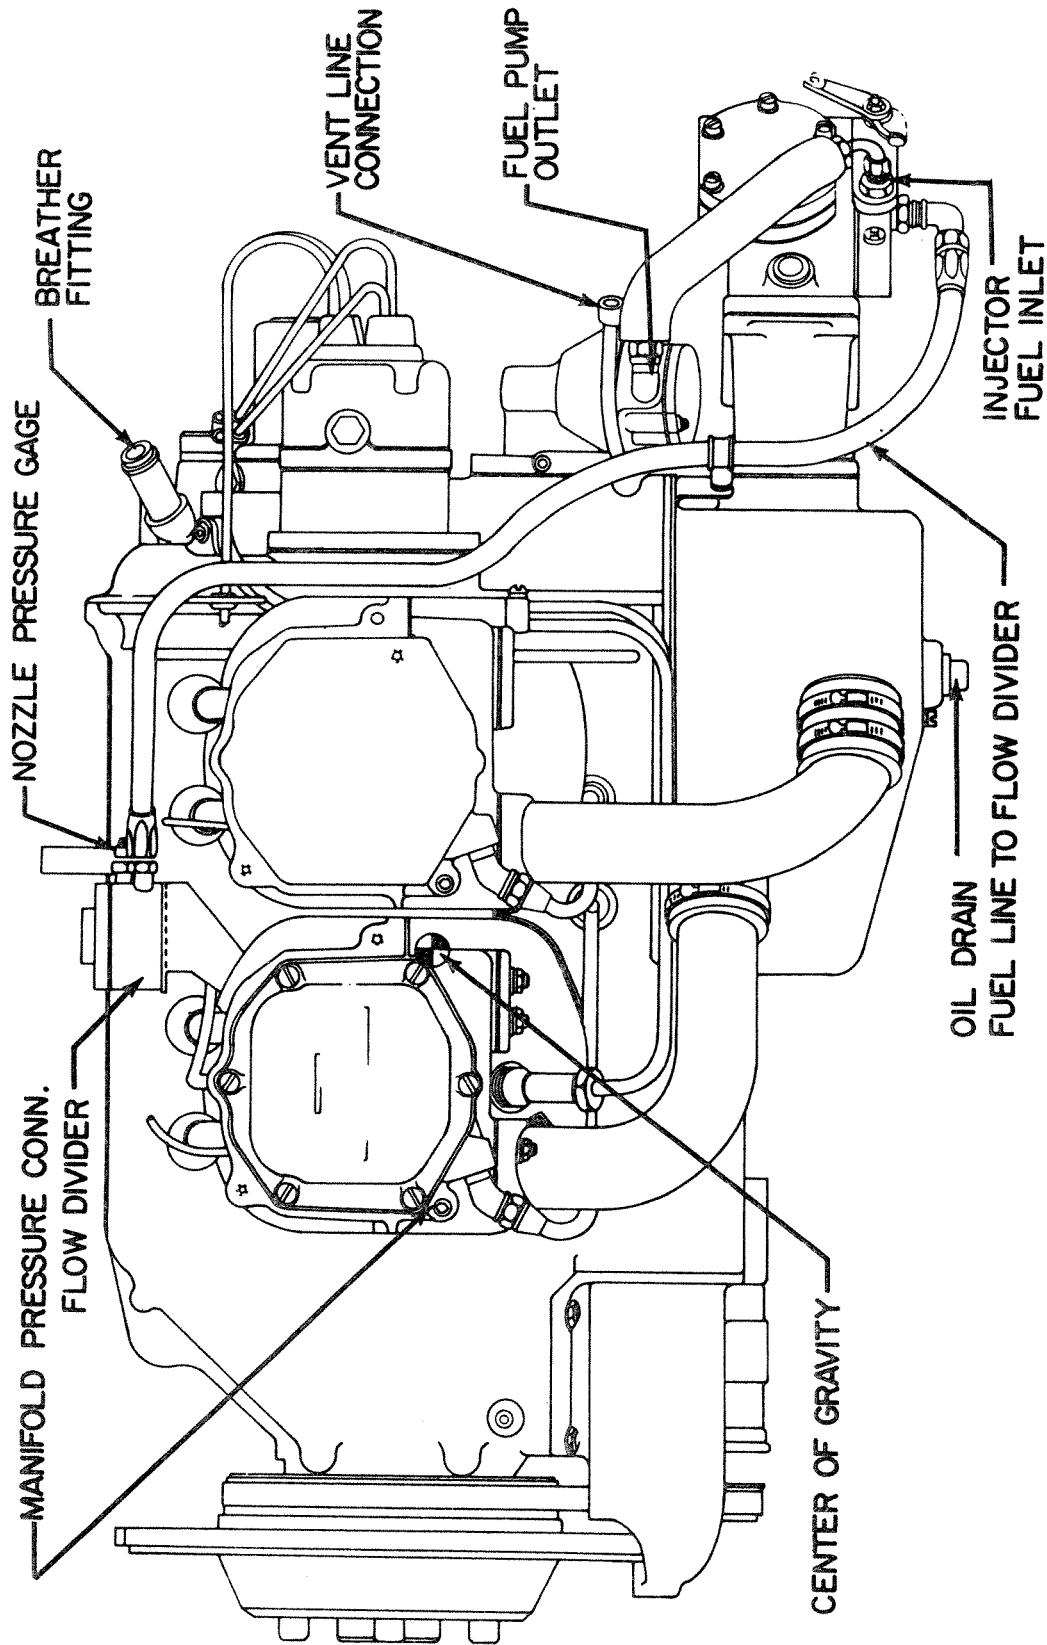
Installation Drawing Left Side View - Typical IO-320-B Series
